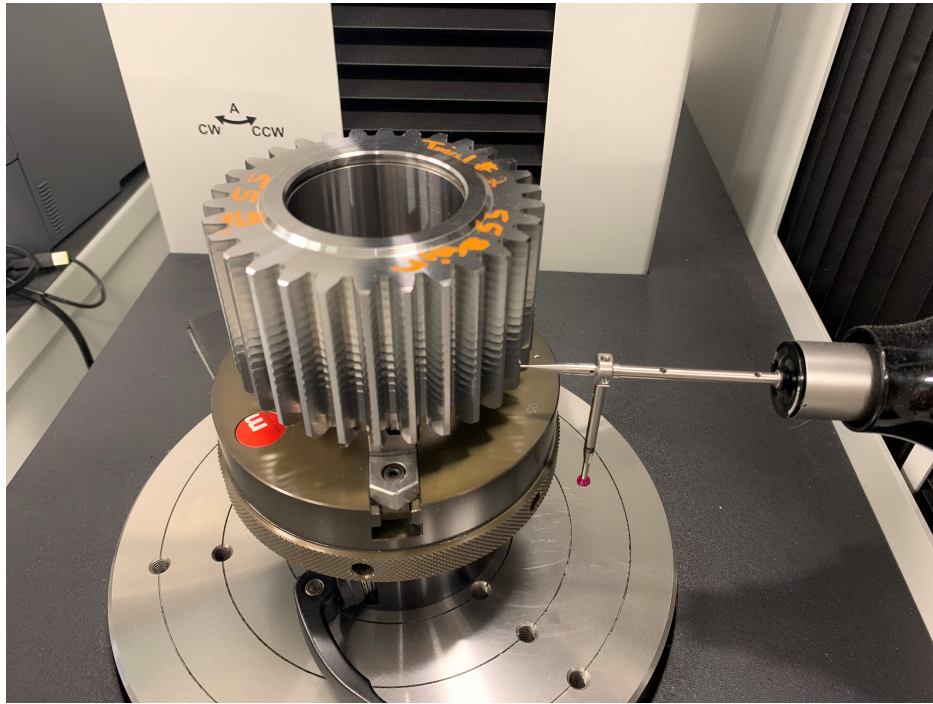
Gear inspection on GLEASON 300GMS Lead & Involute Checker
